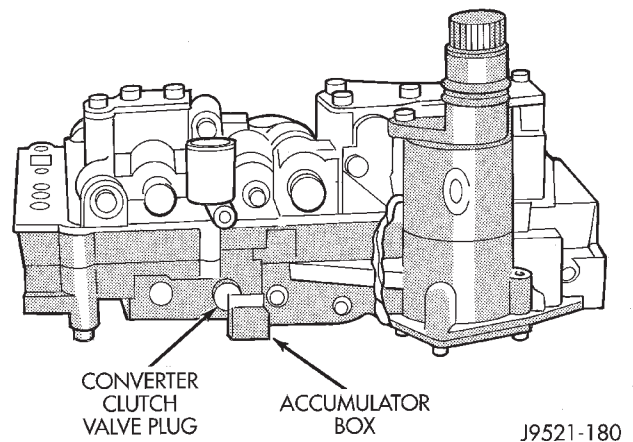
Seating 3-4 Accumulator On Lower Housing
